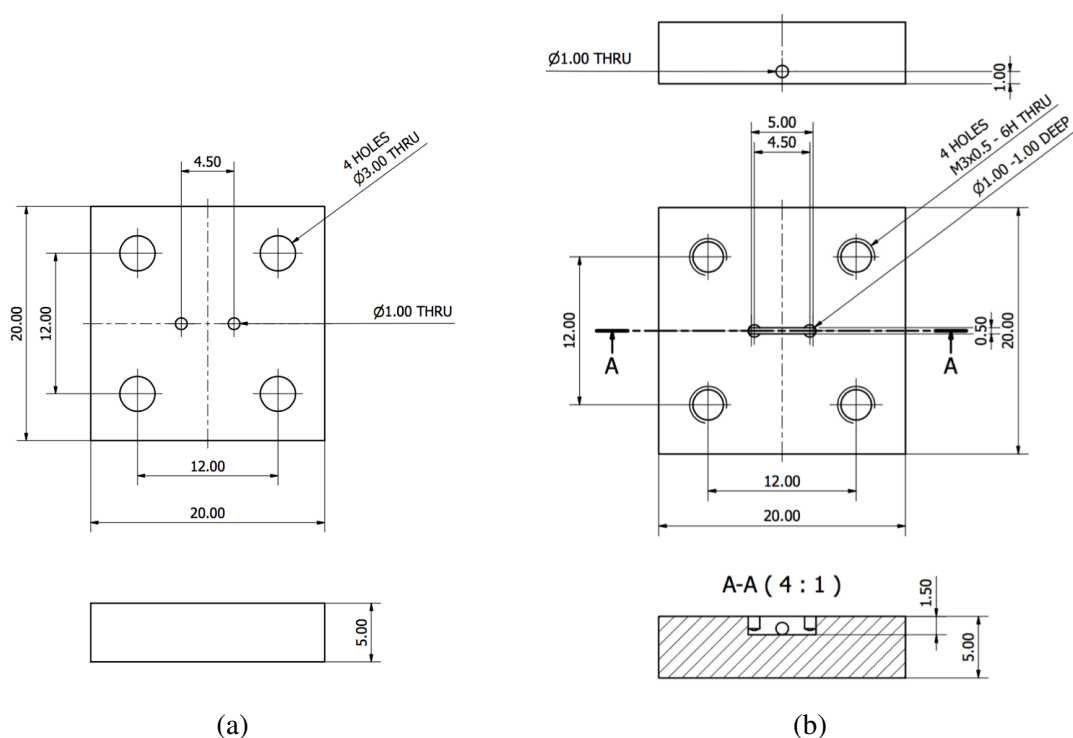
Engineering drawings of device 1. (a) Top layer; (b) Bottom layer. Dimensions are in millimetres.
